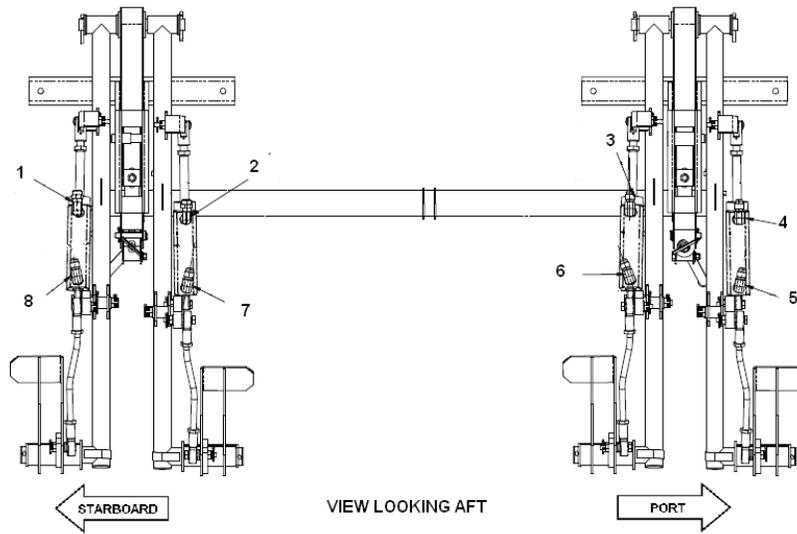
Brake Pedal Assembly Hydraulic Line Fittings
